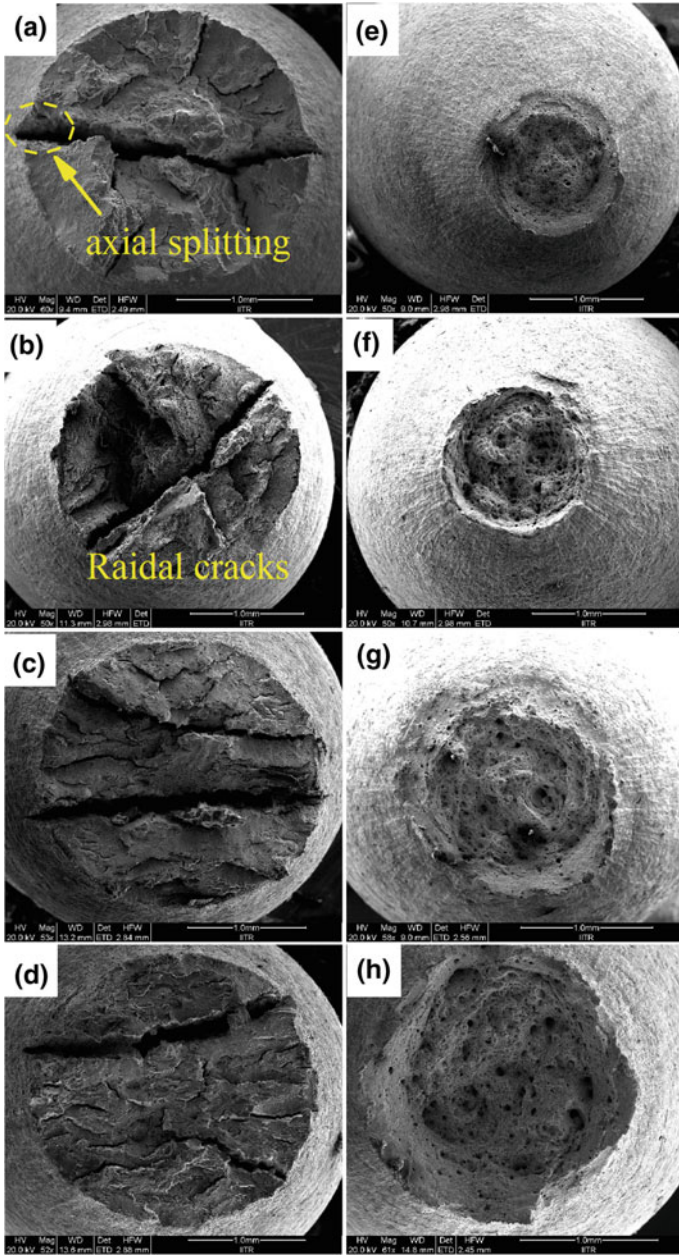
Fractographs showing fracture surfaces a N1050-T750 at RT, b N1050-T700 at RT, c R1050-T700 at RT, d R550-T700 at RT, e N1050-T750 at 650 °C, f N1050-T700 at 650 °C, g R1050-T700 at 650 °C and h R550-T700 at 650 °C
